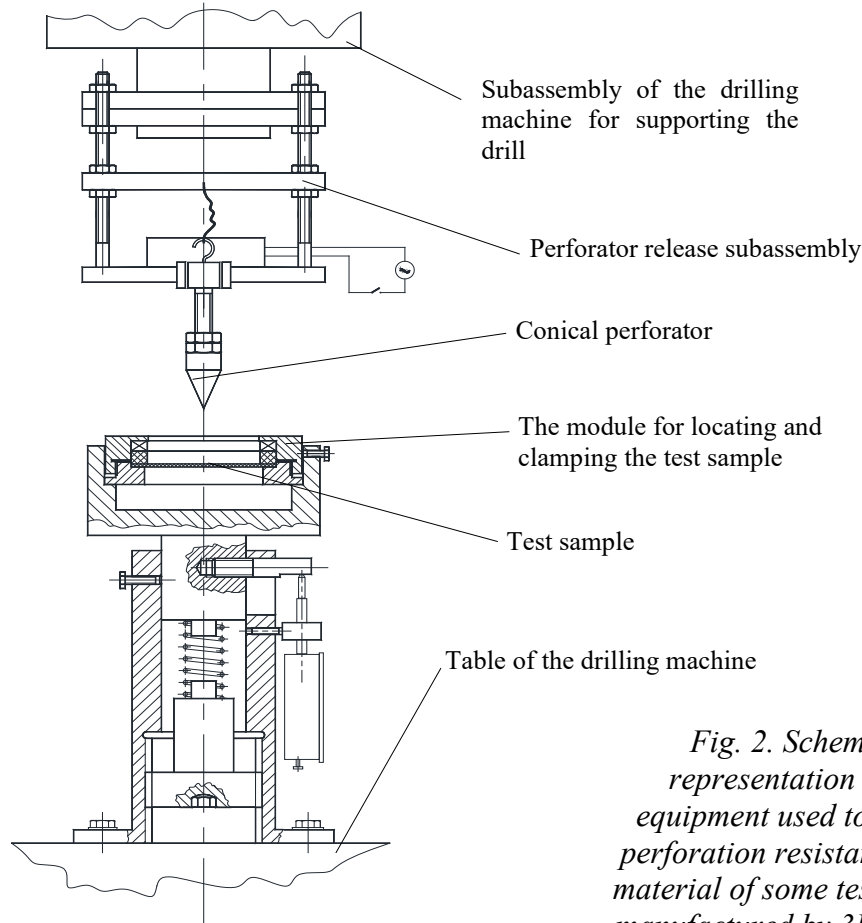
Schematic representation of the equipment used to test the perforation resistance of the material of some test samples manufactured by 3D printing
